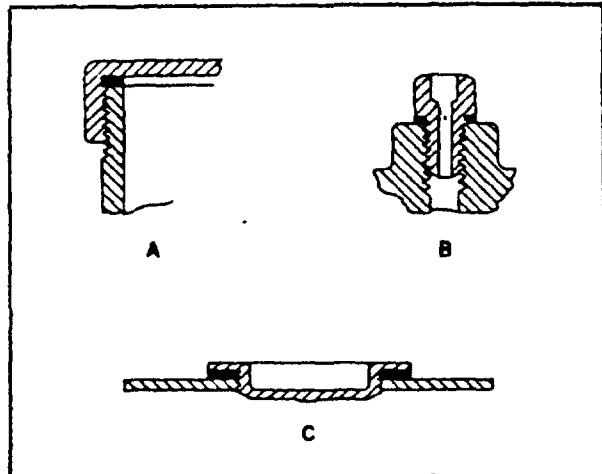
Use of Inextensible Gaskets in Threaded Joints
